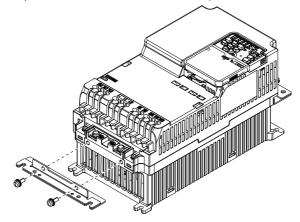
Install Bracket 2 (Bottom of the Drive)
